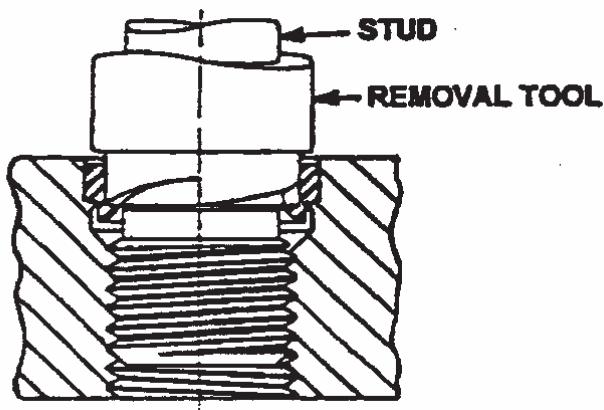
Rosan® Stud Removal Tool Installed on Stud
